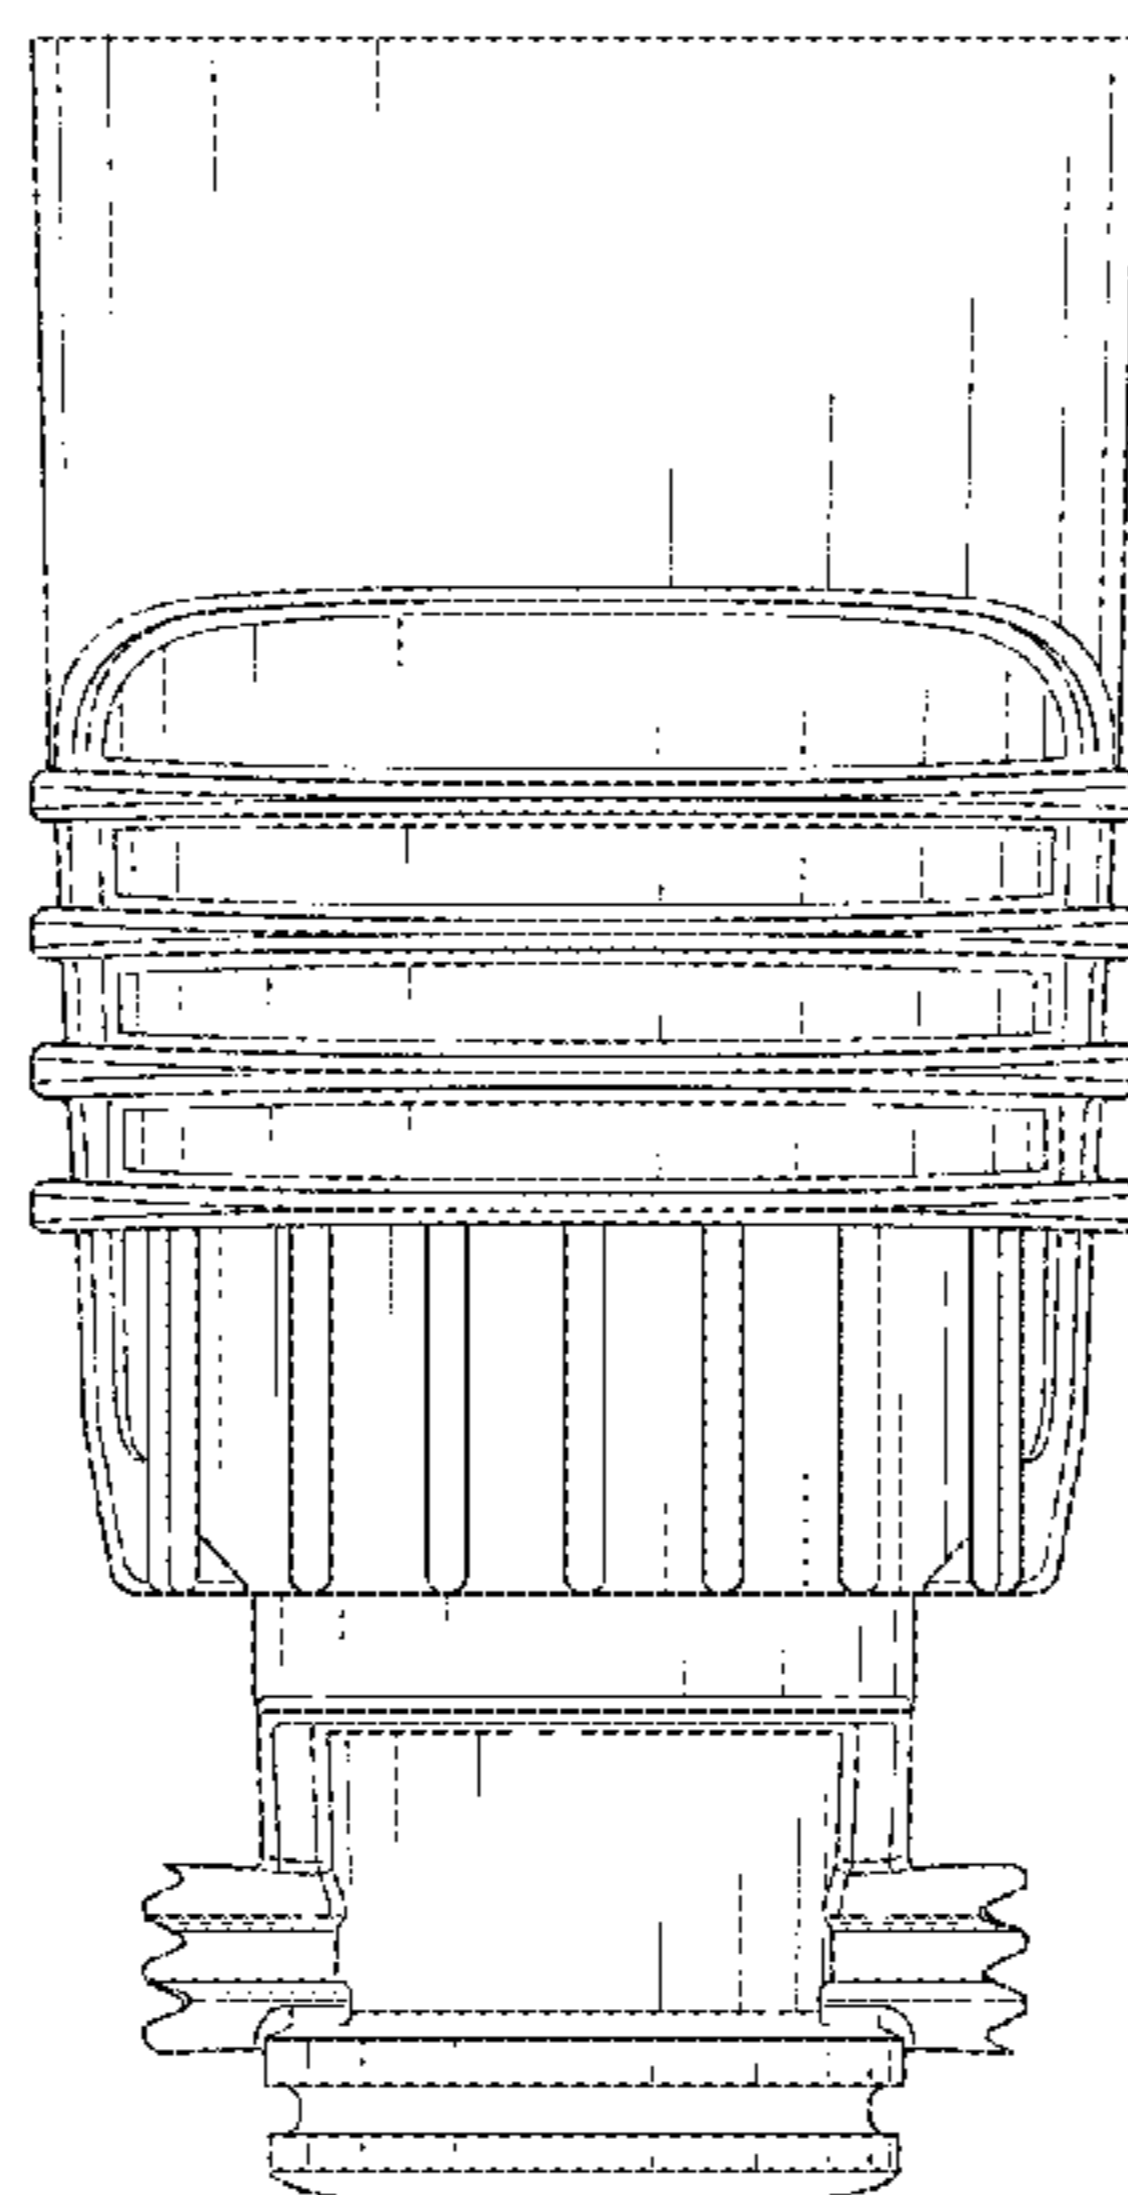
is a rear elevational view of the nozzle of FIG. 1.
